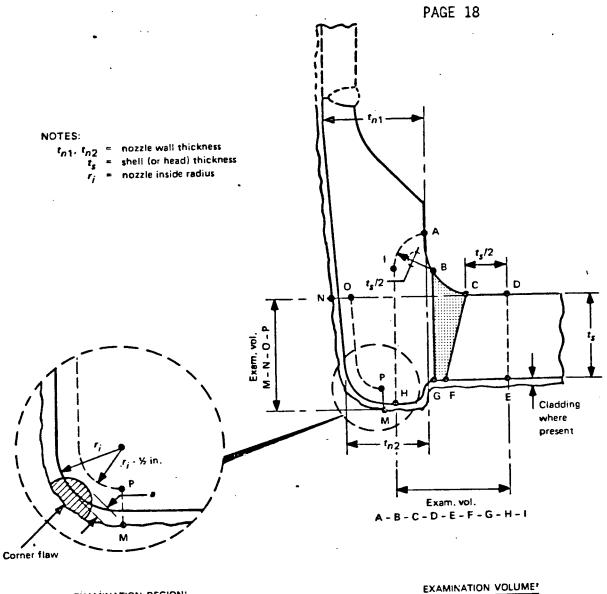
NOZZLE-TO-SHELL OR HEAD WELD JOINTS (Applies to Nozzles With or Without Internal Reinforcement)
